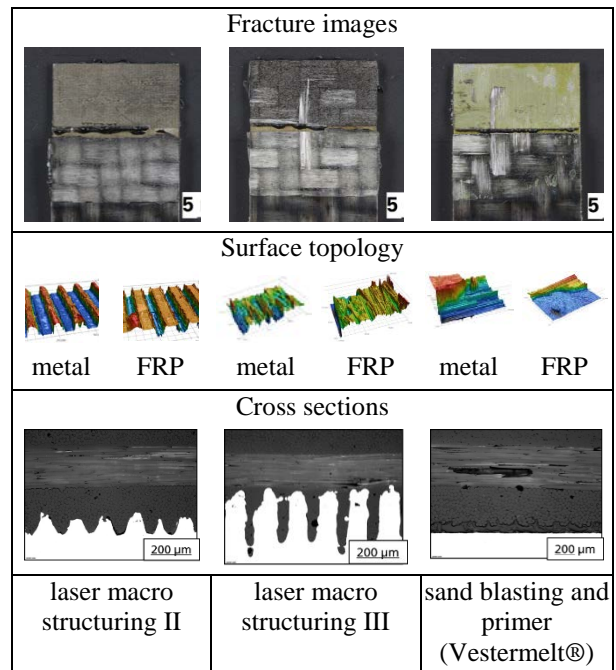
Fracture images with surface topology and cross sections of metal-polymer joints, generated with hotplate technology; variation of pre-treatment: laser macro structuring II (left); laser macro structuring III (middle); sand blasting and primer (right), material: mild steel
